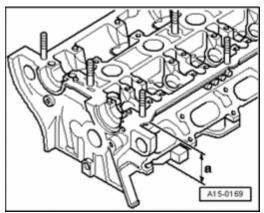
Reworking Dimension, Cylinder Head Courtesy of VOLKSWAGEN UNITED STATES, INC.
